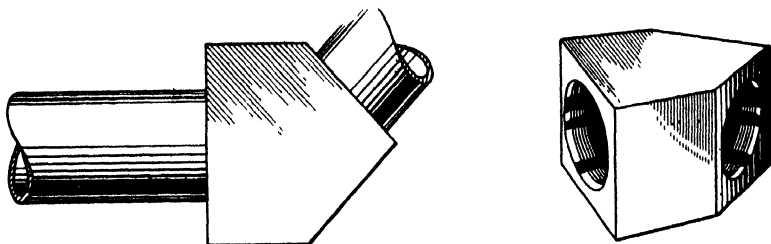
45° ELBOW FITTING PRODUCED IN THE FOLLOWING SIZES: 1 in., 1½ in., 2 in., 2½ in., 3 in and 4 in.
